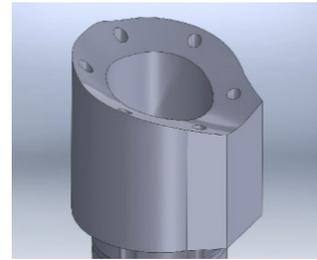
A CAD drawing created using a magnetic resonance image of a monkey's head, to be used to machine a custom head post.
